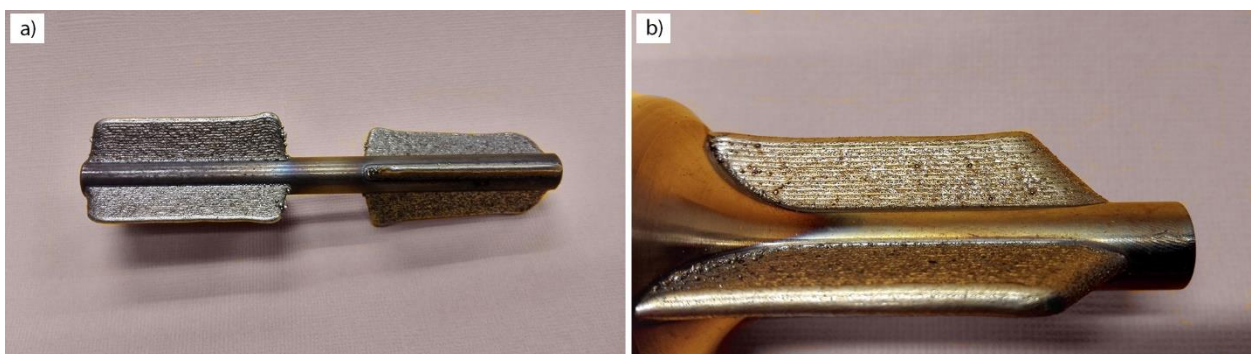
As-received specimens. a) SS316L-Si deposited on SS304, and b) SS316L-Si deposited on SS316L. The specimen 1, with deposited material on SS304 base material was initially not intended to be used for anything other than demonstrative purposes by the producer, thus for this specimen no cleaning procedure was performed prior to deposition and the production parameters used was not optimal. For these reasons, this specimen will be used as a
